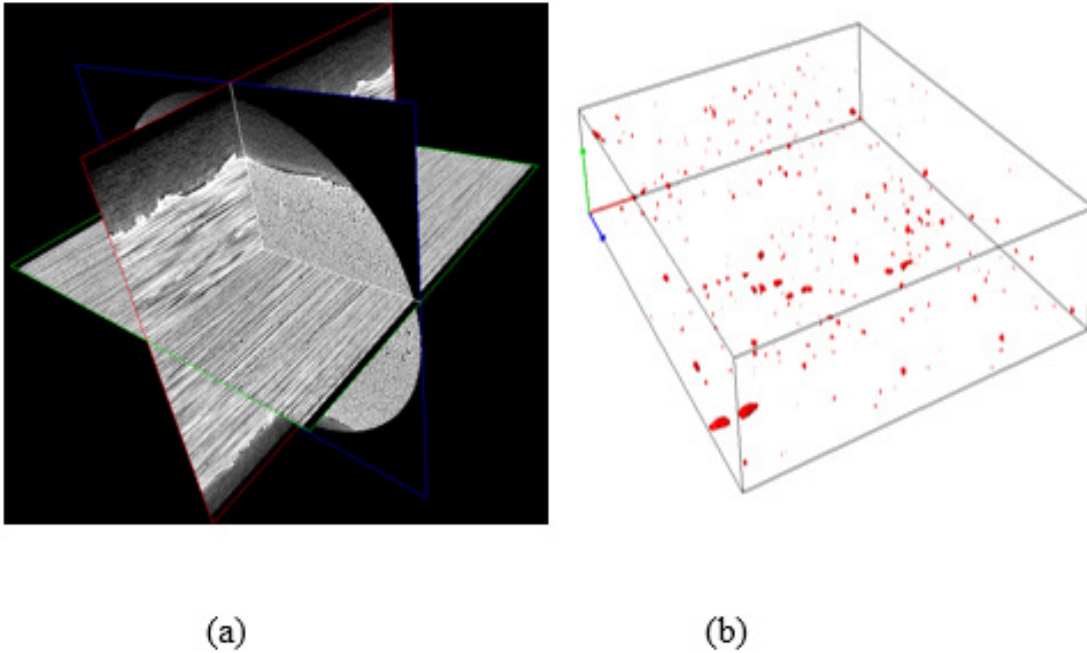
Undamaged sample with manufacturing defects. (a) Planer View (b) 3d View after image processing
